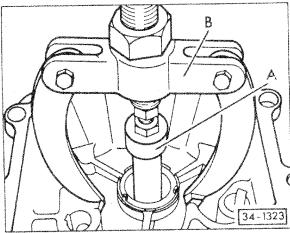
Pinion bearing outer race in gear carrier housing cover, removing
